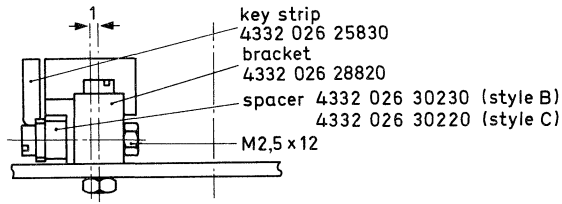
Key strip mounted to a male part with straight dip-solder pins.
